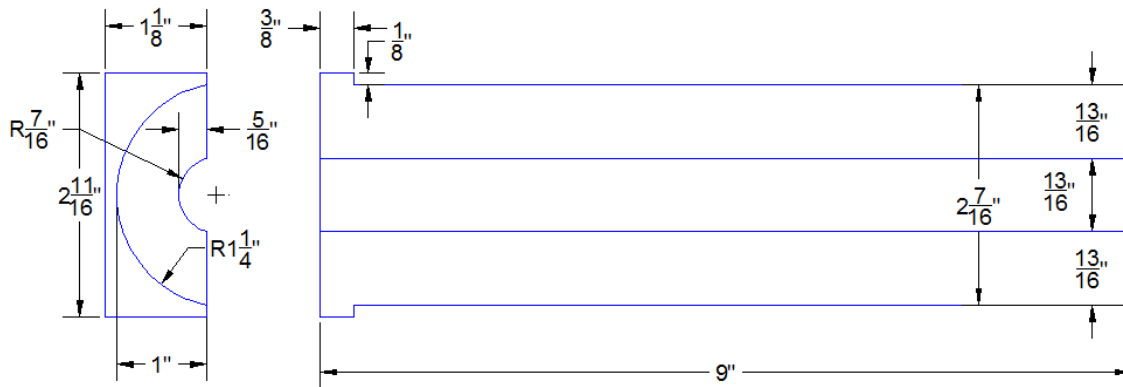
Dimensions of 0.7 in. strand gripping device
